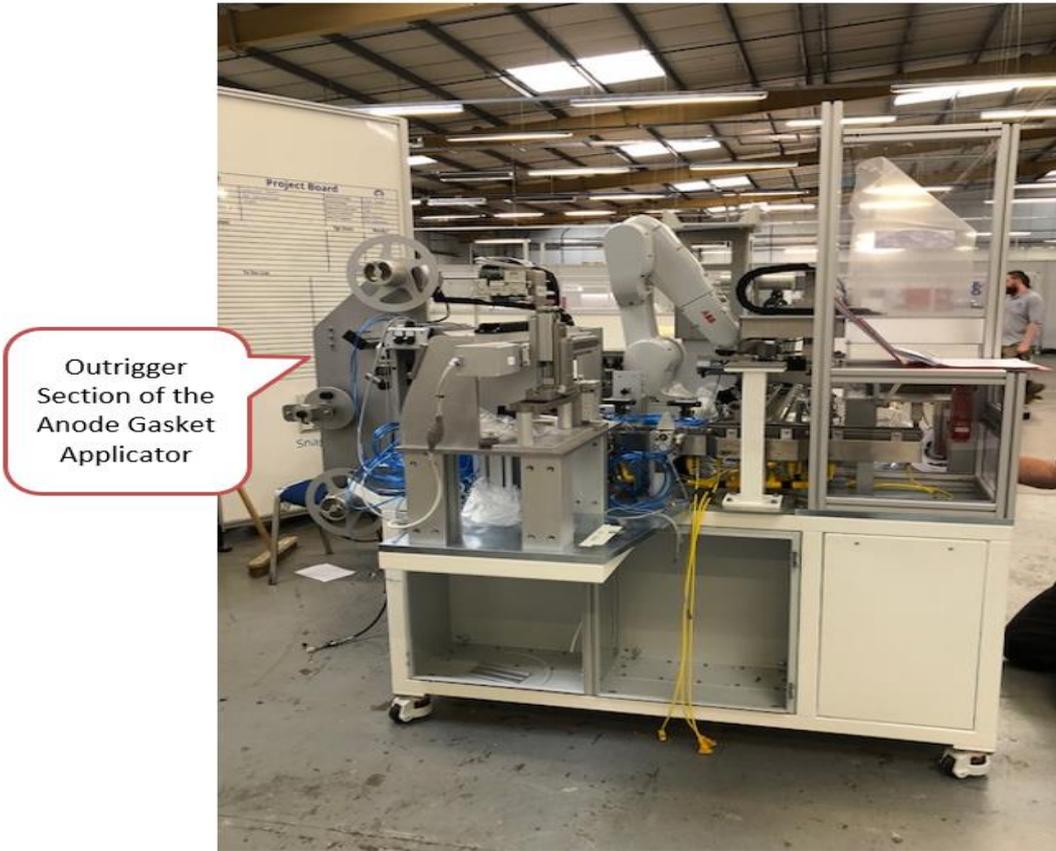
Side View of PoP Demo Machine Frame with Anode Gasket Applicator Outrigger
